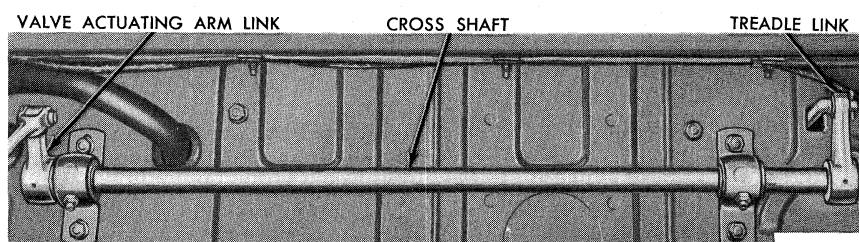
Control Valve Linkage Cross Shaft—H-Series
